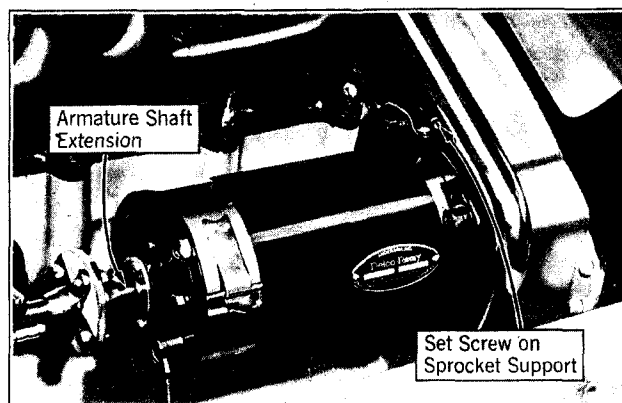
The generator sprocket support is between the generator and the chain housing.
